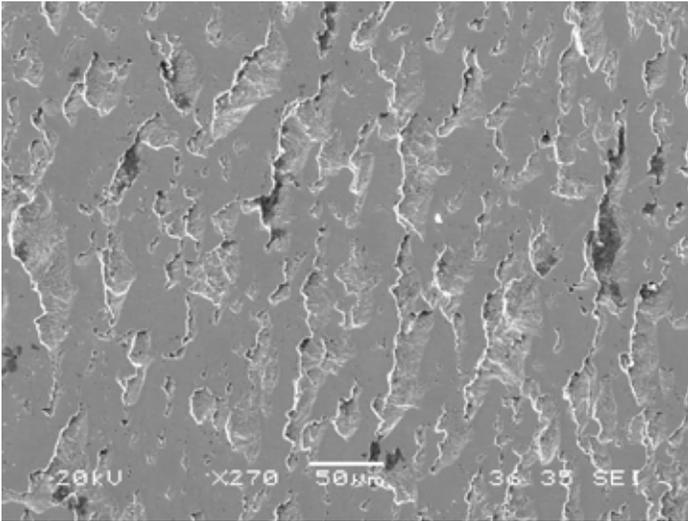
Micropitting on a gearbox gear obtained using an SEM
